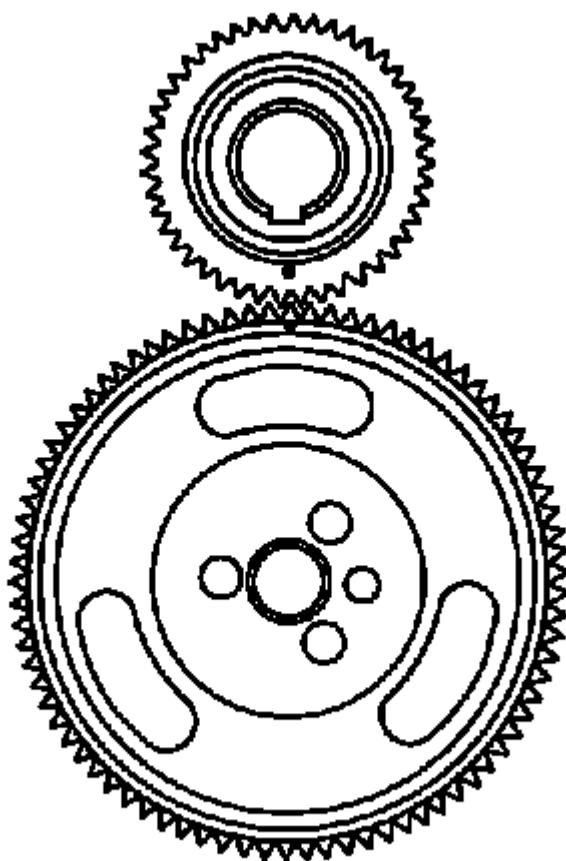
View Of Balance Shaft Drive Gear & Balance Shaft Driven Gear Timing Marks Aligned
